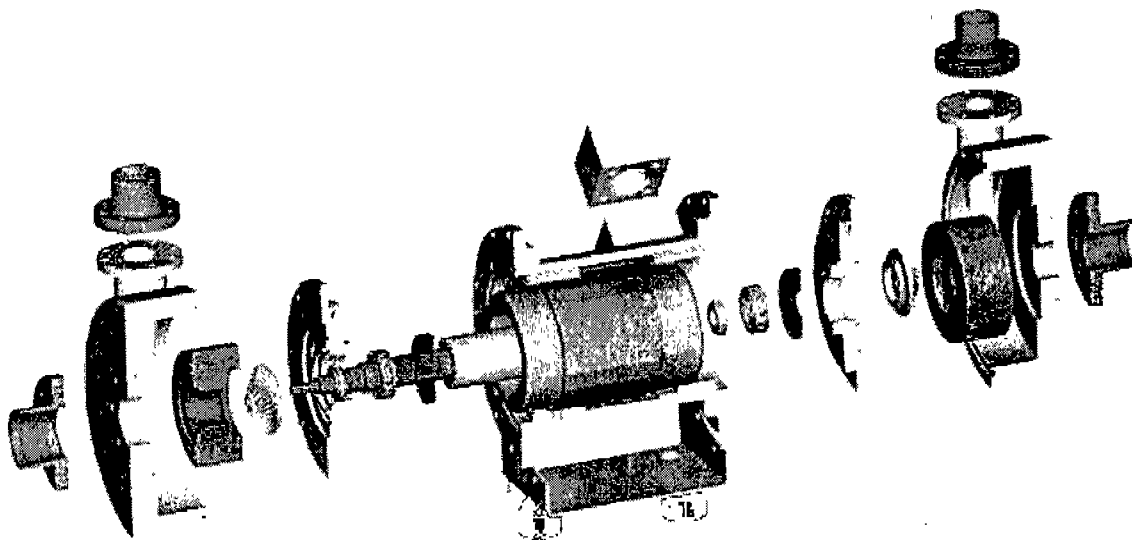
Twenty Five Ton Prototype Compressor Exploded View
